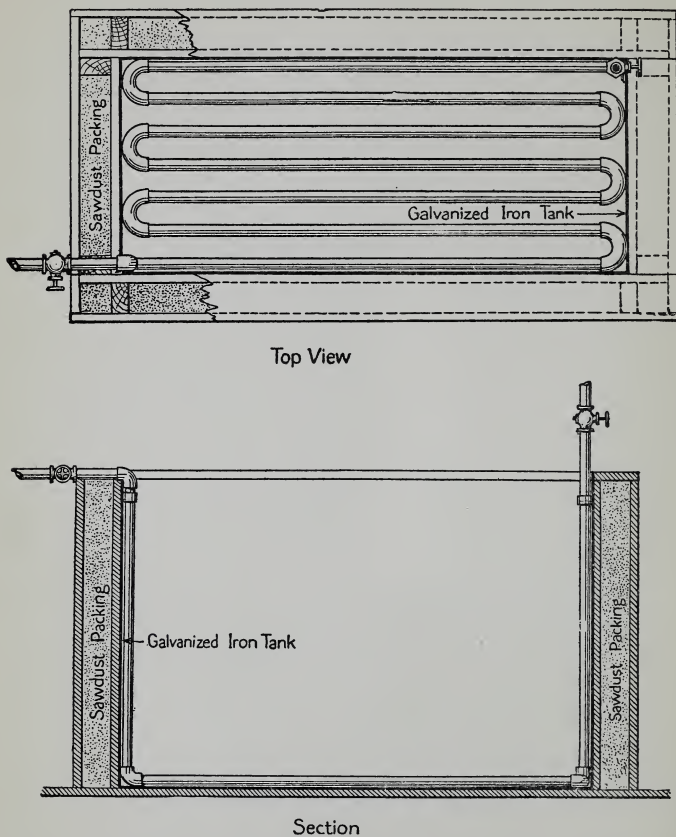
Sectional and Top Views of Open Tank used in Wood Preservation.
